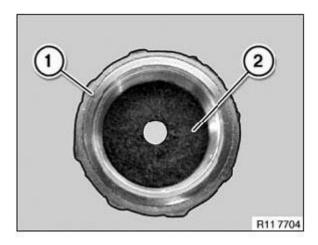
Identifying Valve Cage And Felt Washer Courtesy of BMW OF NORTH AMERICA, INC.
